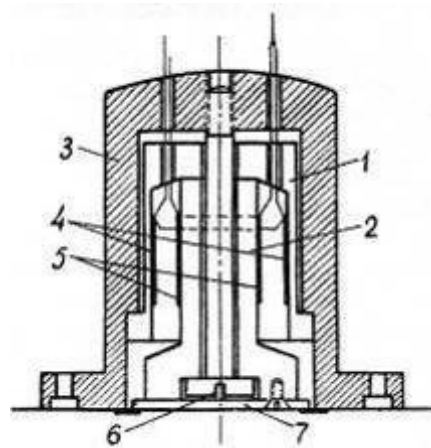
A schematic diametrical sectional view of the sensor for measuring small ground pressure:
